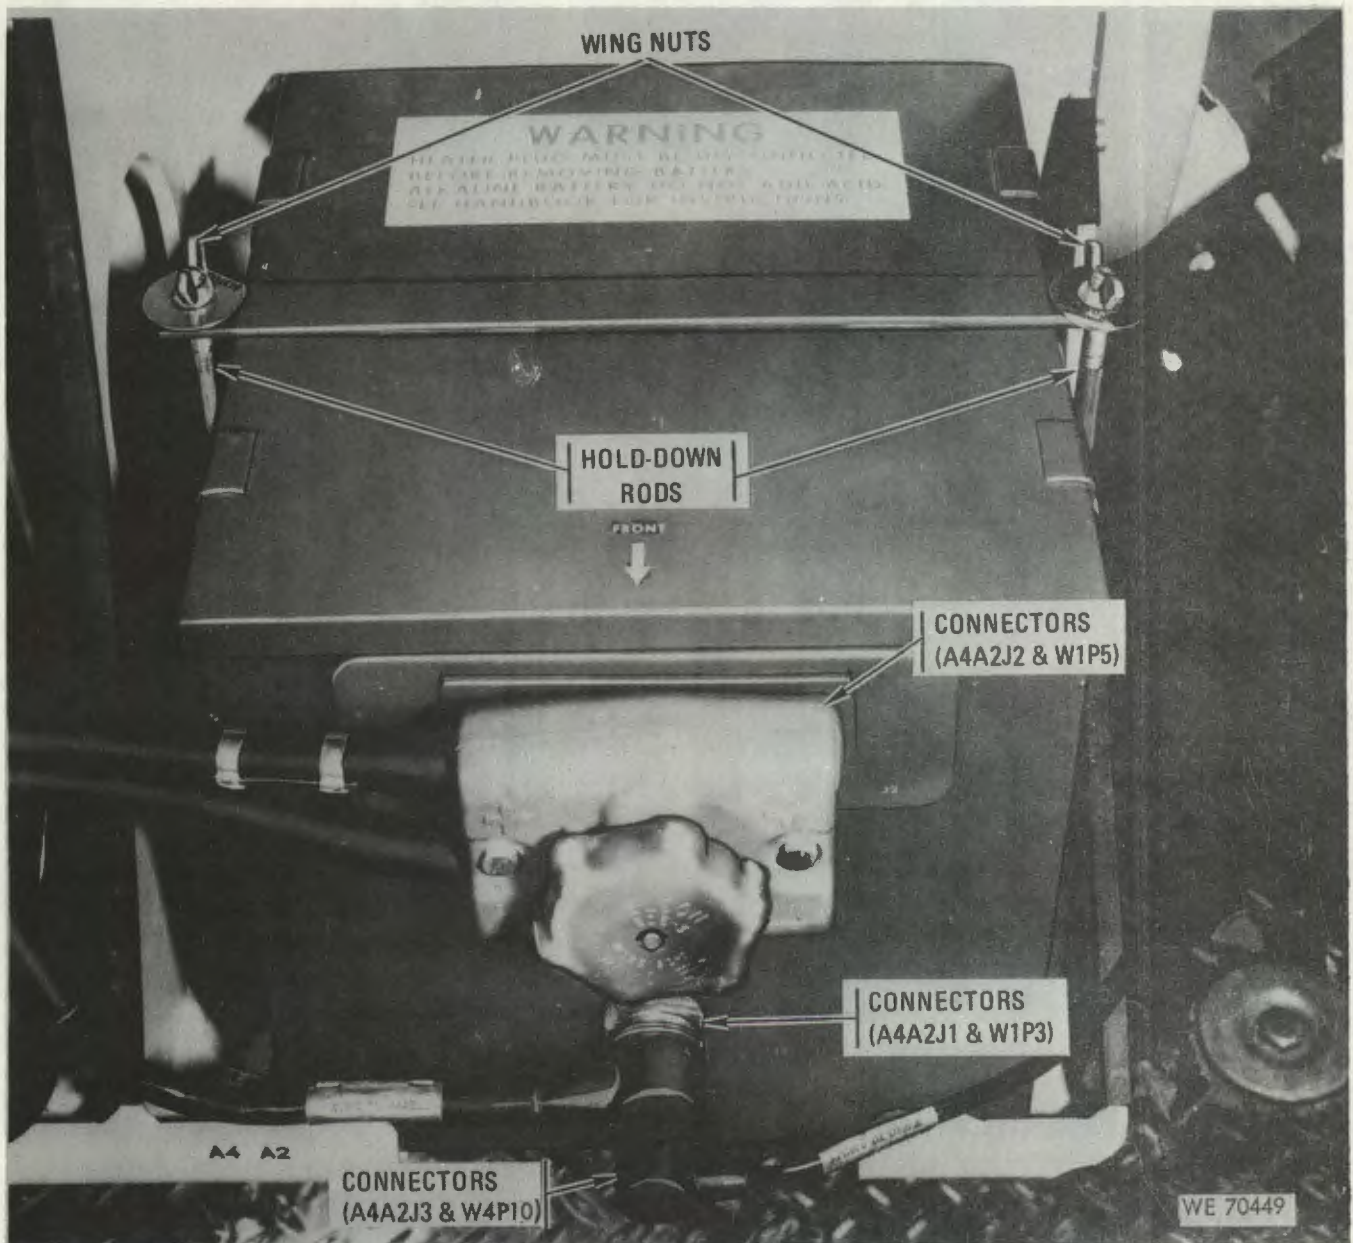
Mount battery A4A2, typical removal/installation details.
